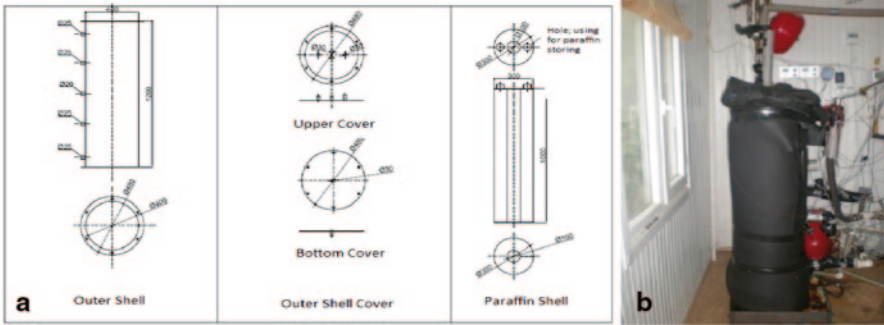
a Technical drawing of LHS (left). b Insulation (right)
